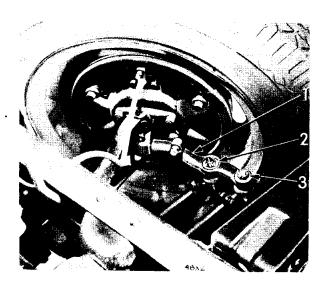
Right Side Axle Steering Arm, Drag Link and Tie Rod Assembled (B-4-F, B-4-G, B-4-H, B-4-J, B-4-K, B-4-R, B-4-T, B-4-V)
